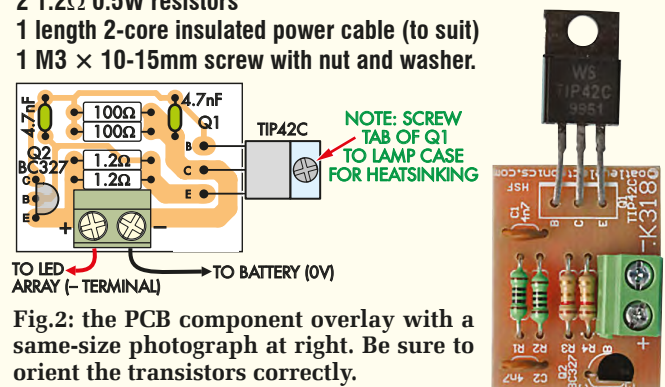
the PCB component overlay with a same-size photograph at right. Be sure to orient the transistors correctly.
